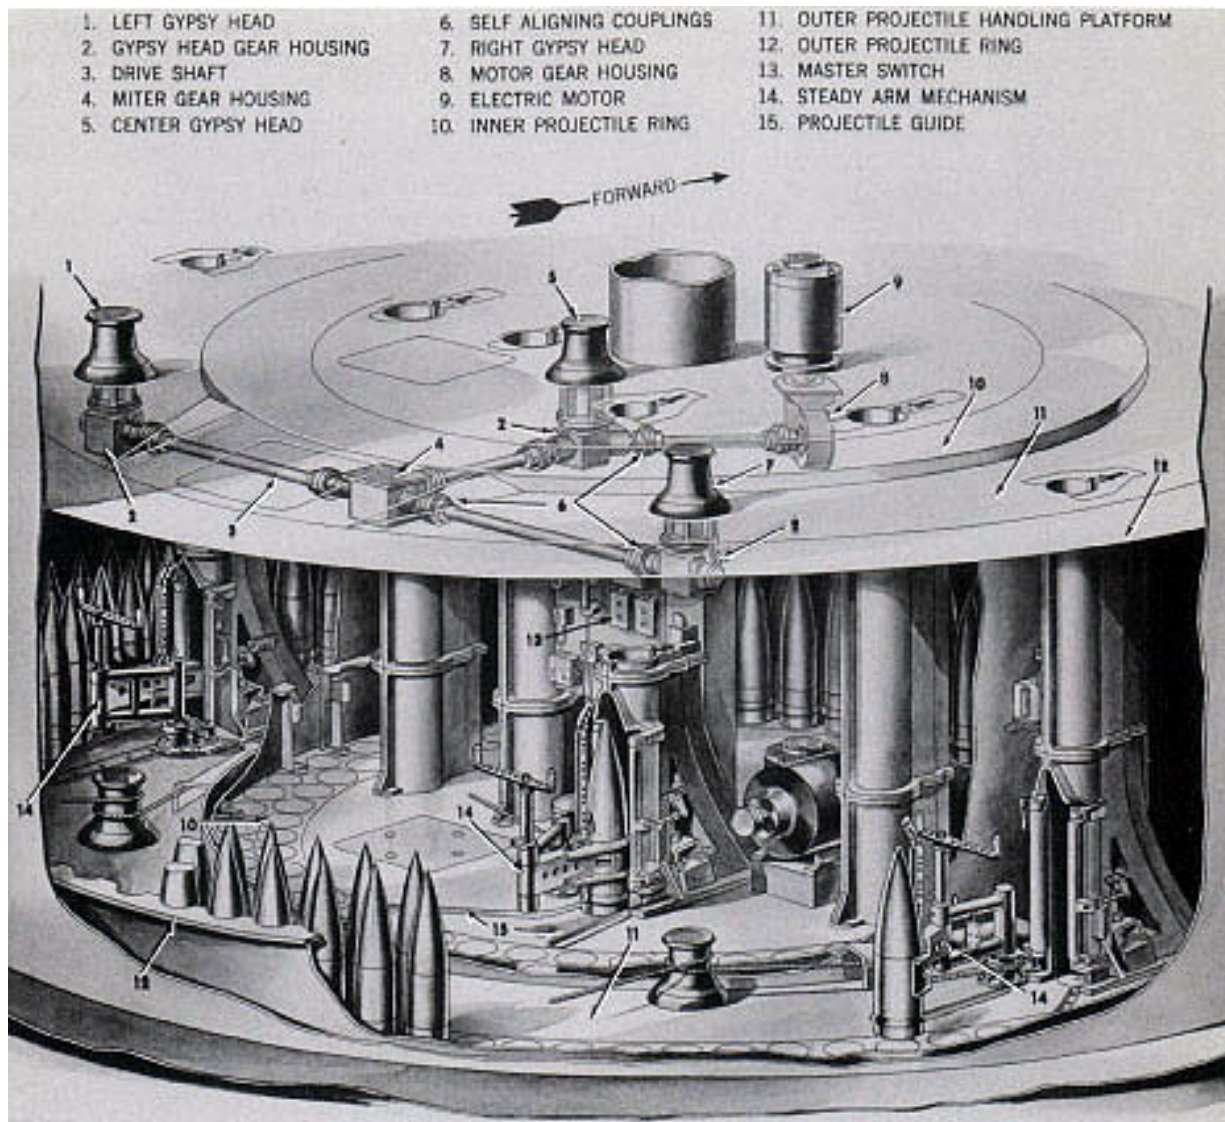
Parbuckling Gear Arrangement Upper and Lower Projectile Flats
